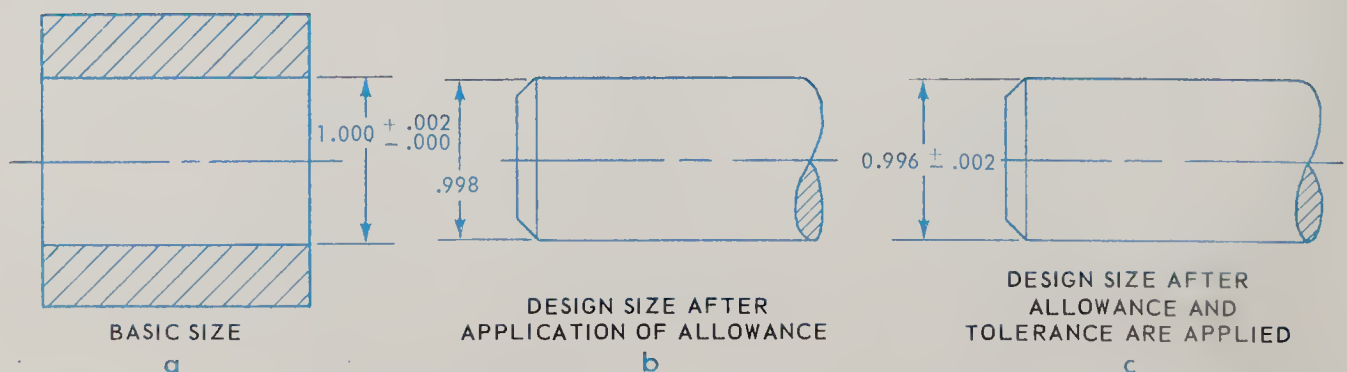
Size terminology used in dimensioning and tolerancing.
